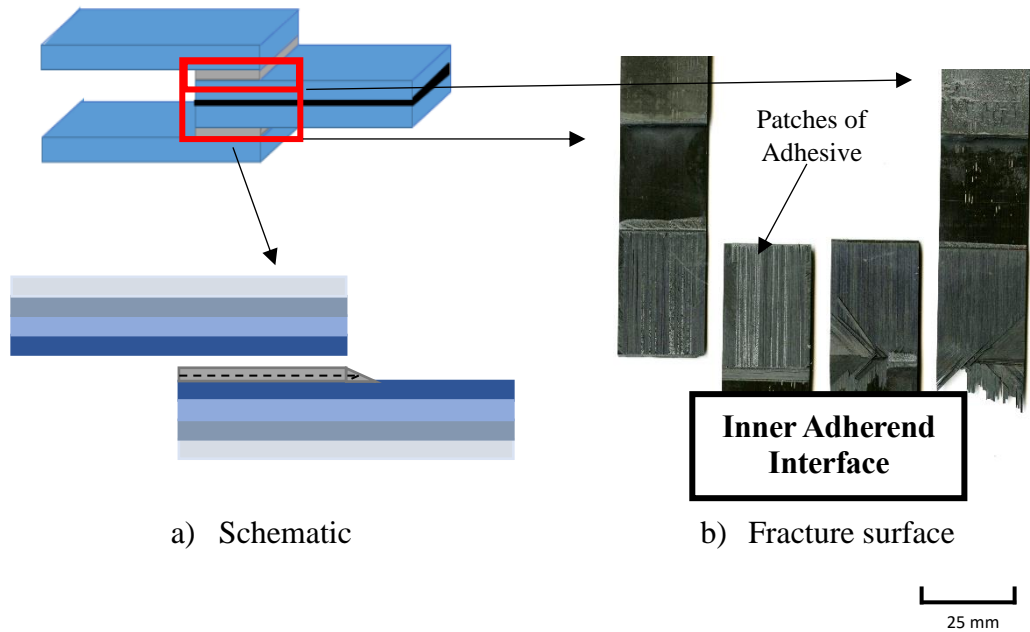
Failure schematic and fracture surface for plasma treated specimens.
